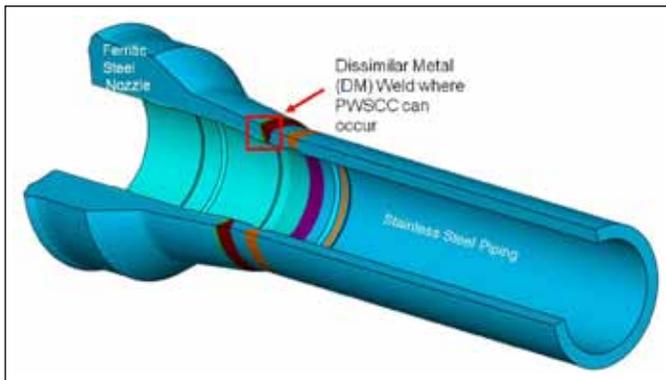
Cutaway view of a carbon steel nozzle DM weld and stainless steel piping typical in a light-water cooled nuclear power plant
